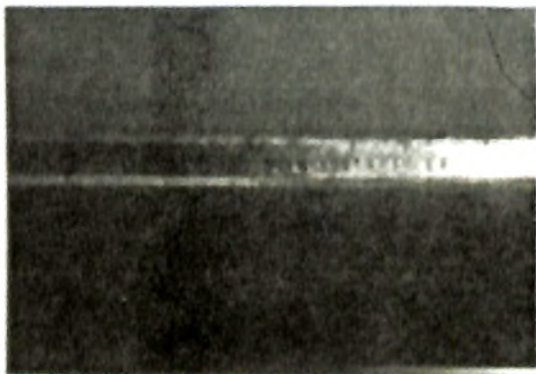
Filler weld in an excavator boom, using PZ 6111HS, 1.6mm
